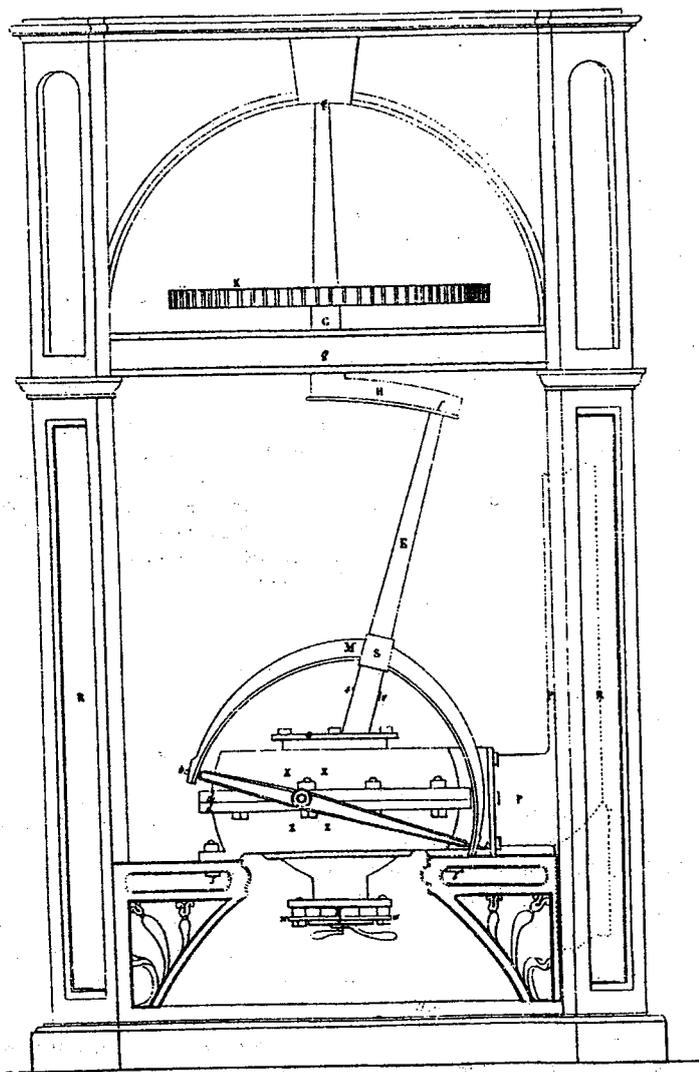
Part of the original specification drawing of the Dakeyne Engine.
